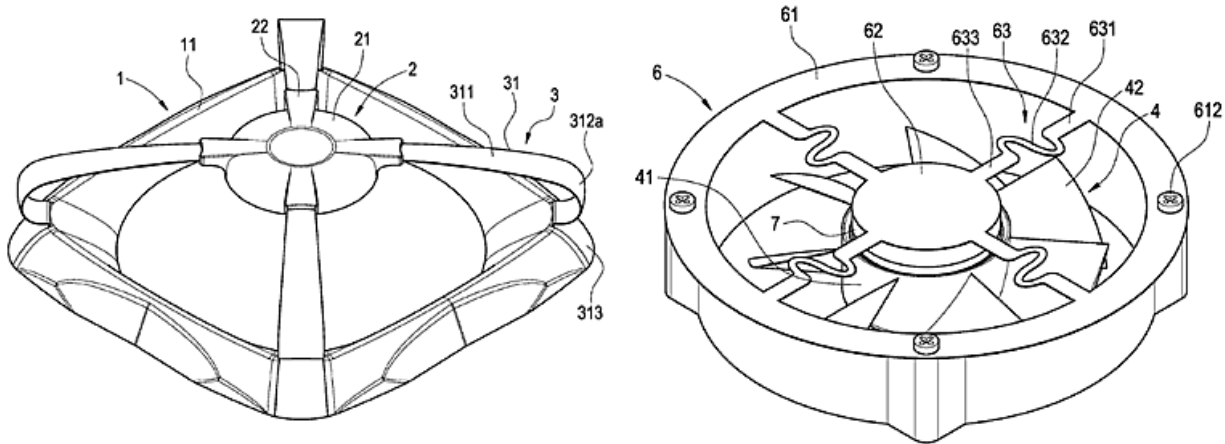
Schematic of Custom Fans with Suspended Rotor [42]
